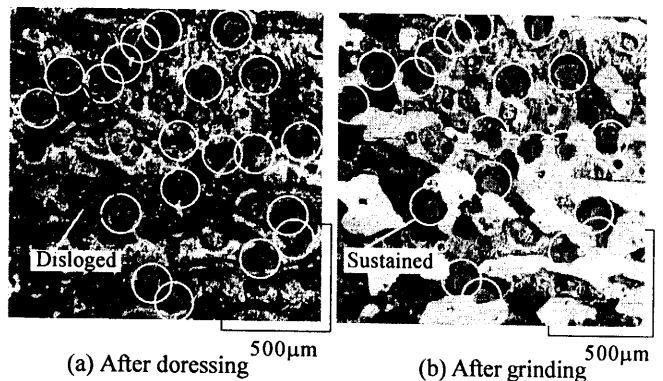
Change of grinding wheel surface with laser-dressing and grinding
